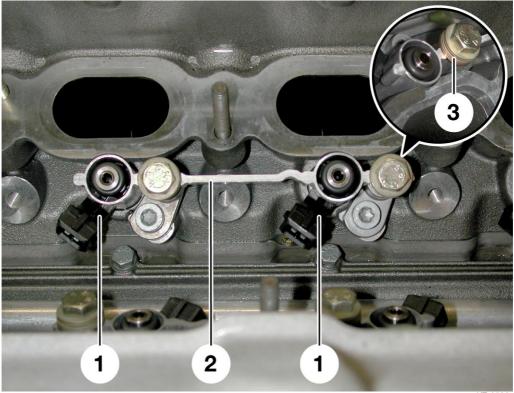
High-pressure fuel injectors with twin hold-down fixture
